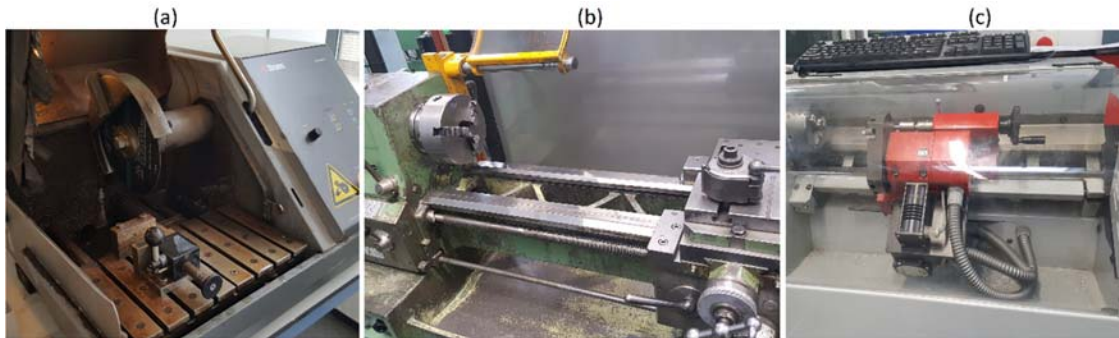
(a) Manual saw. (b) Frontal lathe. (c) CNC lathe.
